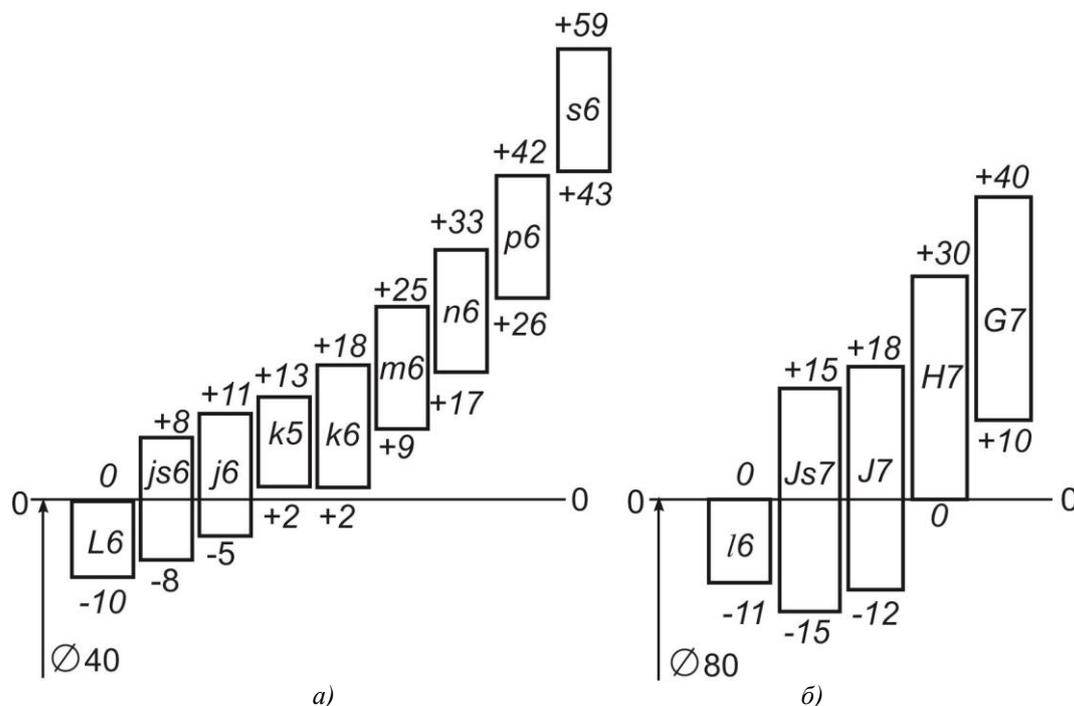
Bearing field tolerances: a) connection of internal ring and a shaft; b) connection of external ring and a frame
